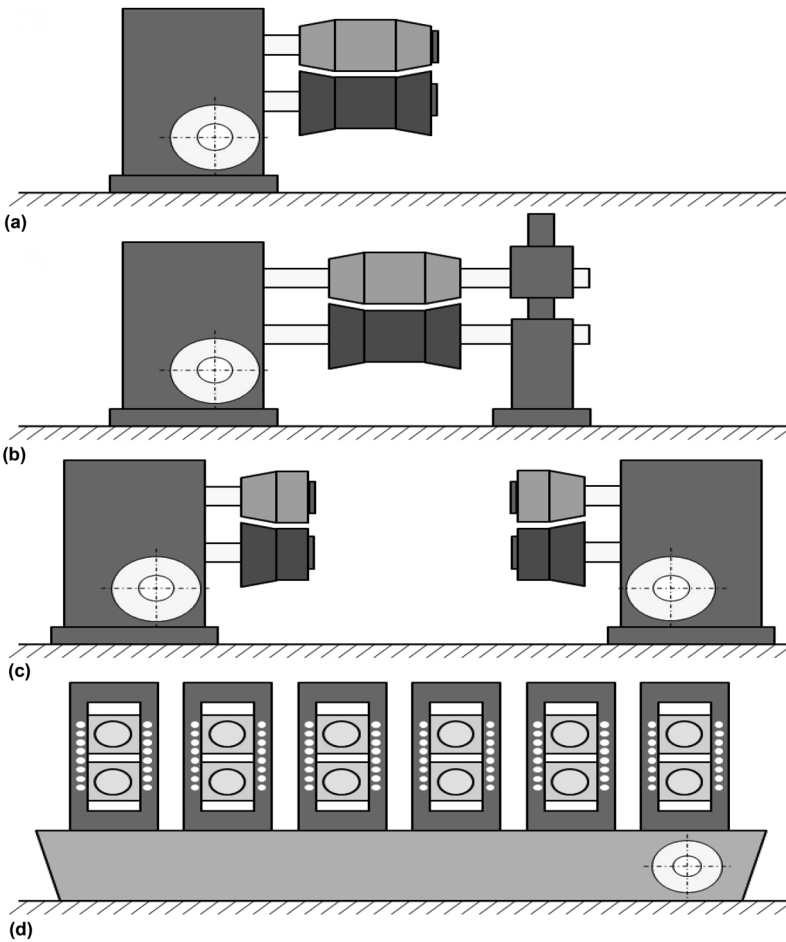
Common roll forming mill configurations. (a) Outboard, (b) Inboard, (c) Double-head, and (d) Raft types
